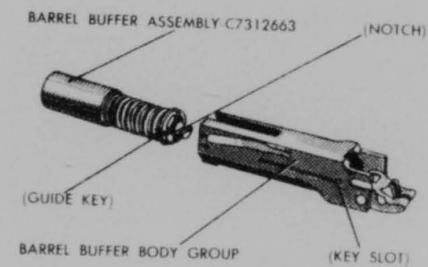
Correct Position of Barrel Buffer Assembly for Insertion Into Body.
